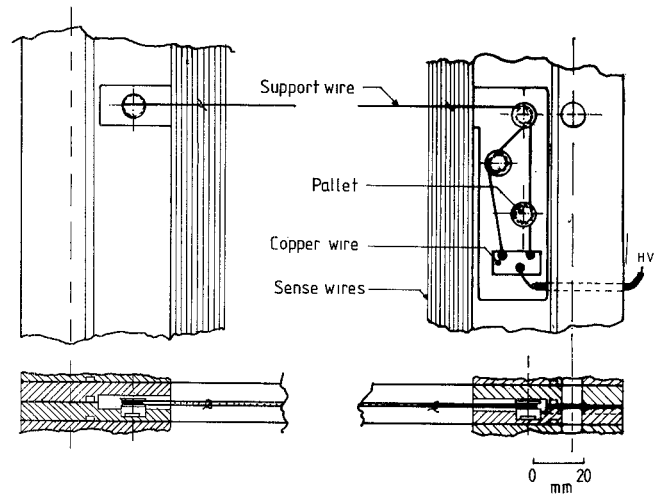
Fastening details (top and cross sectional views). The pallet where the copper wire is anchored is glued in a hole drilled in the Vetronite frame. The small slab where the copper wire is soldered is made of copper and the correcting voltage is fed through a cable running to the exterior.
